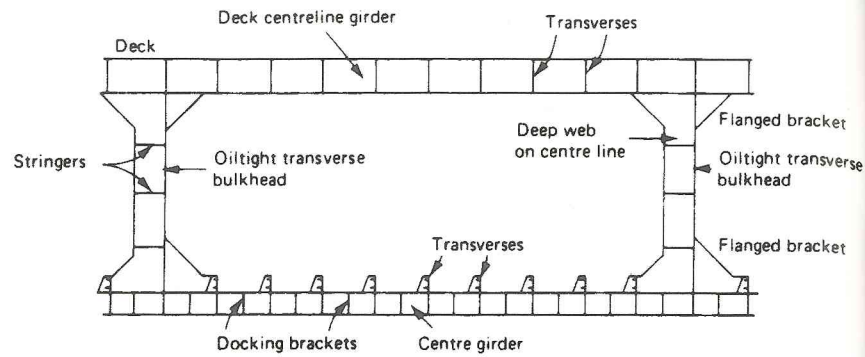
Elevation at centreline of tank (longitudinal framing)
